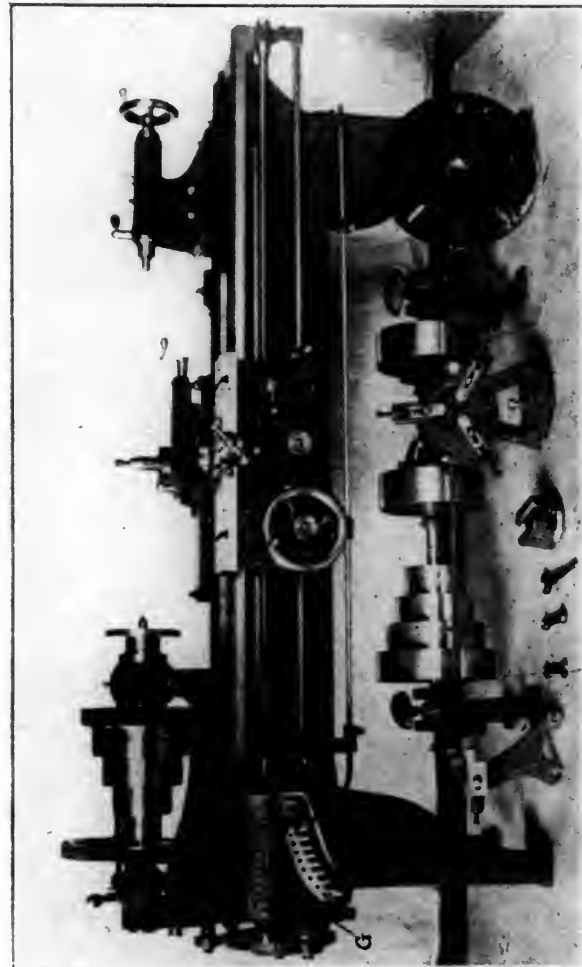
HENDEY-NORTON ENGINE LATHE, SHOWING ARRANGEMENT OF GEAR-BOX.
